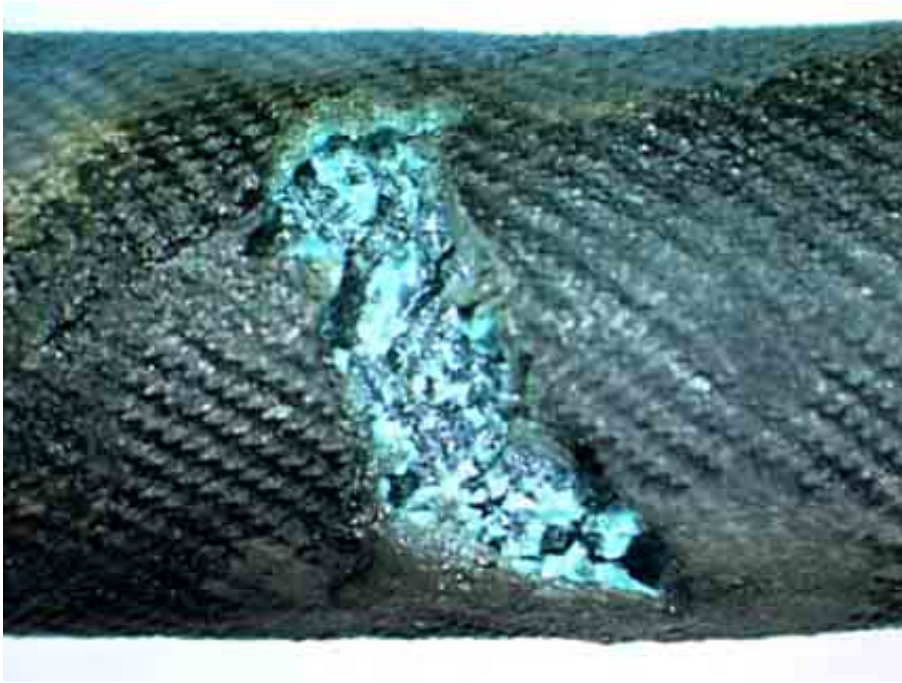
The damaged area on engine No. 3's lube oil monitor hose approximately 2.5 inches from the fracture face.
